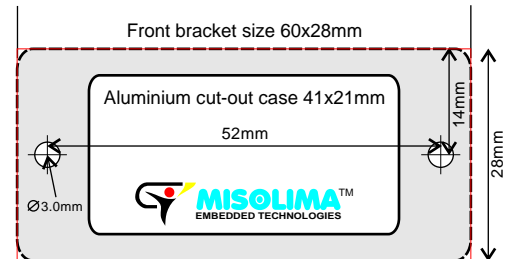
Drill positions for the fastening bracket M203010ST-XXX
